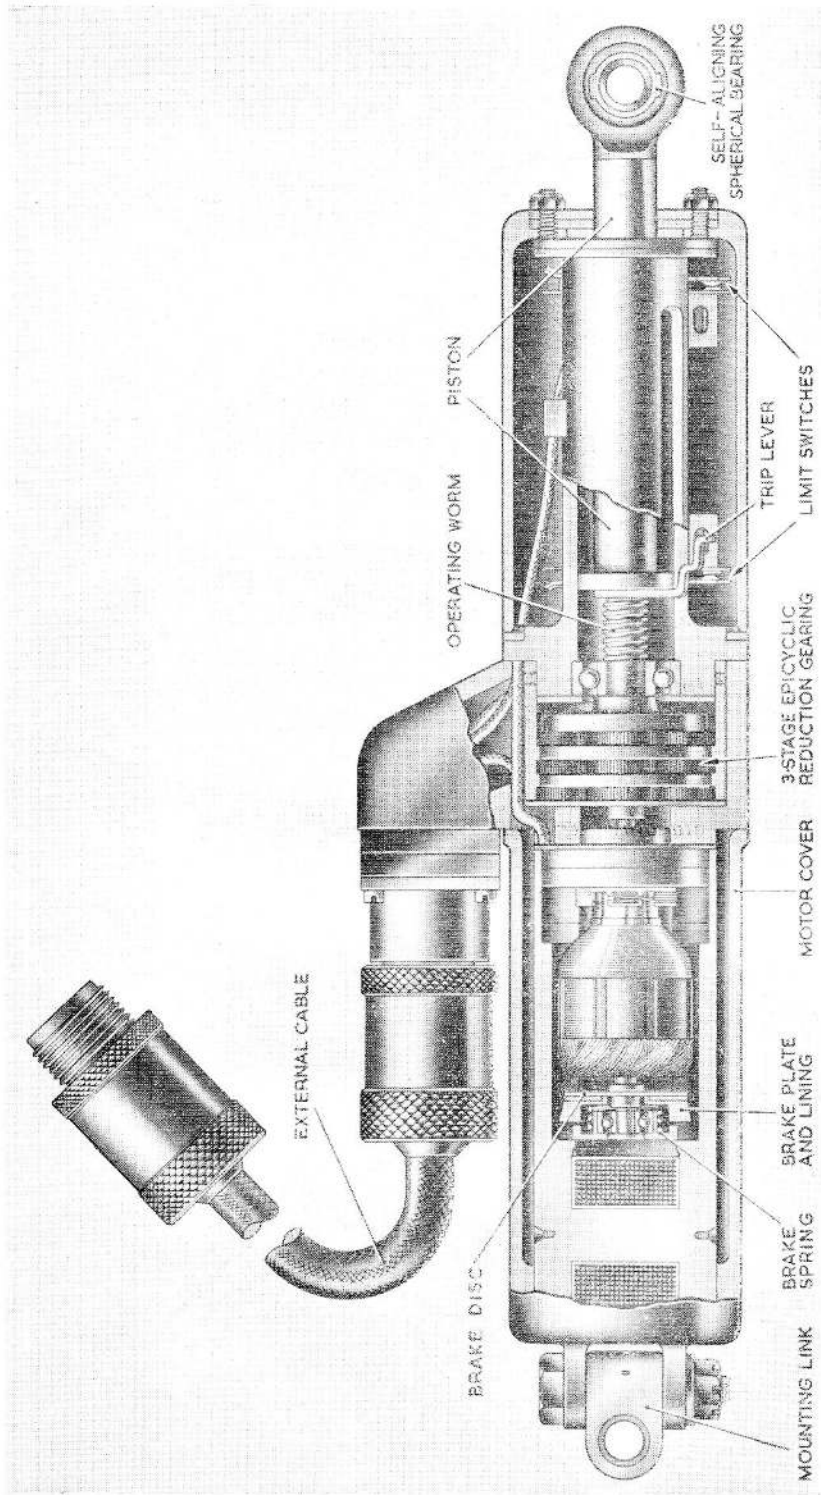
Sectional view of actuator, Western, Type EJ50, Mk. 25
